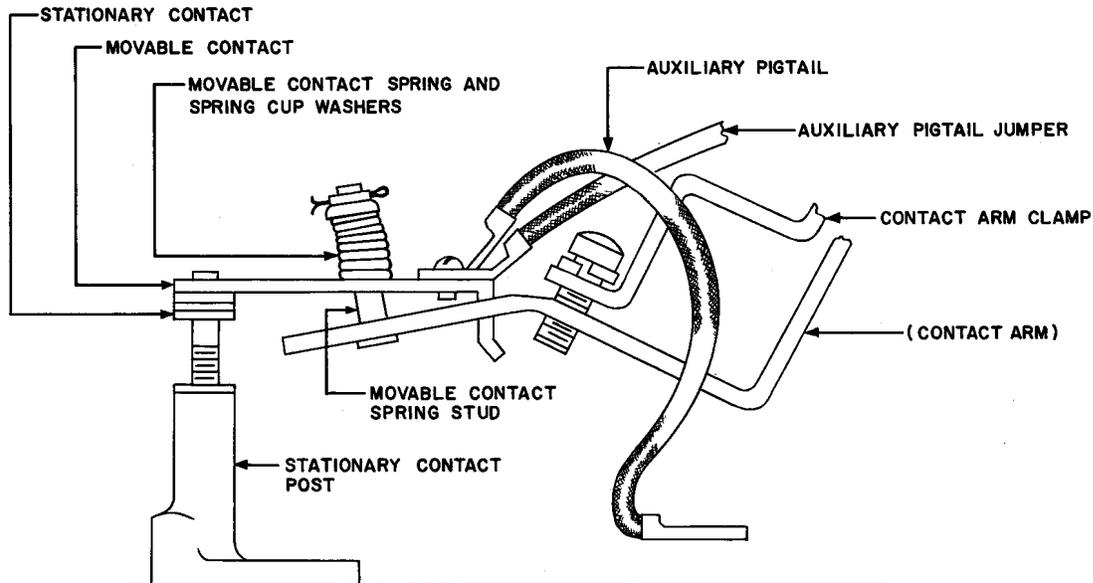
Auxiliary Contact Structure (Butt Type) of 30-, 75-, 100-, and 150-Ampere Contactors
